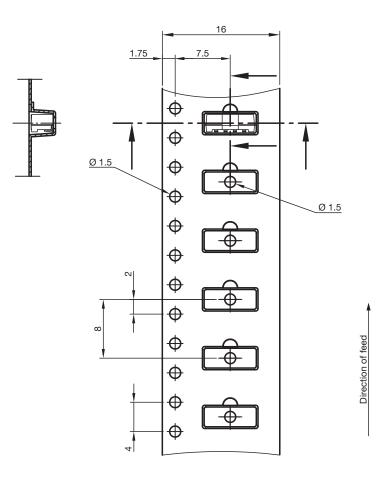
Issue: 2; 06.10.15
